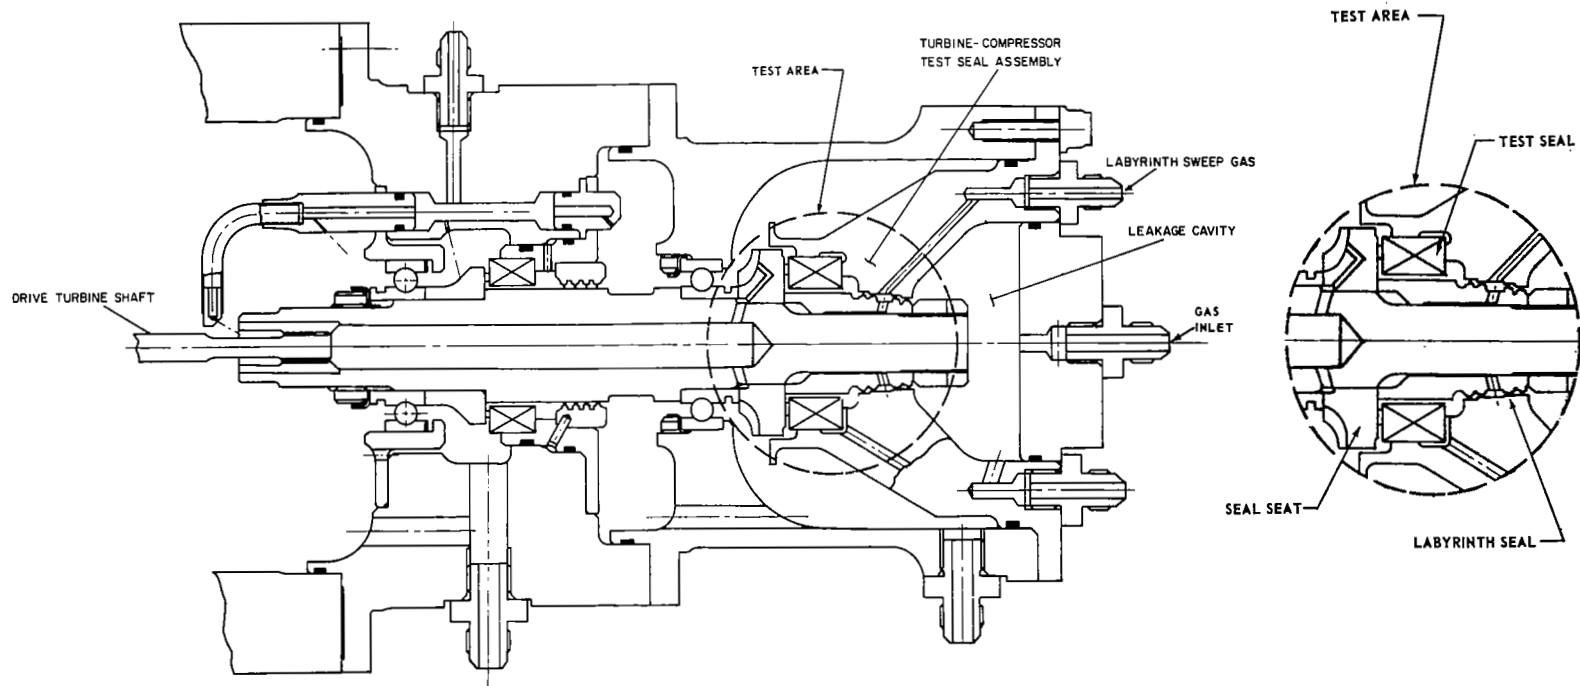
Turbine-Compressor Seal Test rig. Design Speed 50,000 rpm
